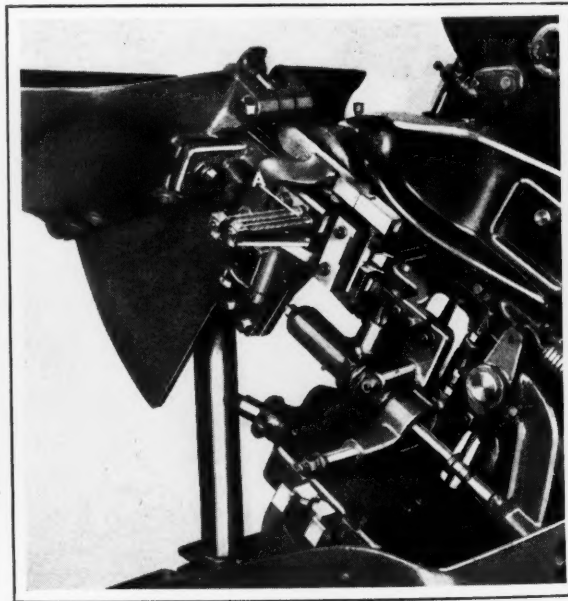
Escapement Attachment Located on Landis Machine as Shown at A
